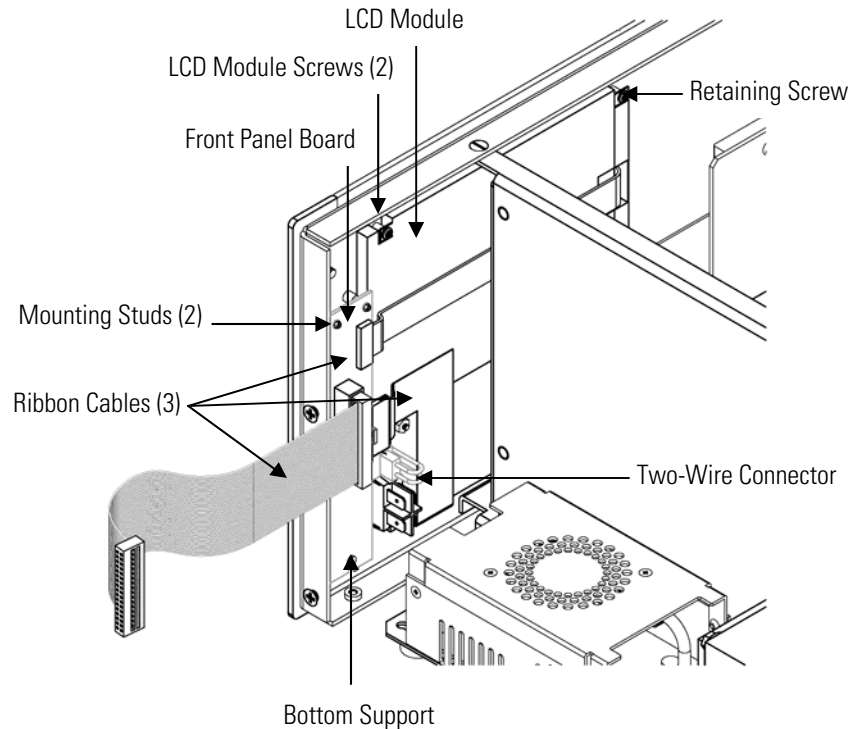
Replacing the Front Panel Board and the LCD Module
